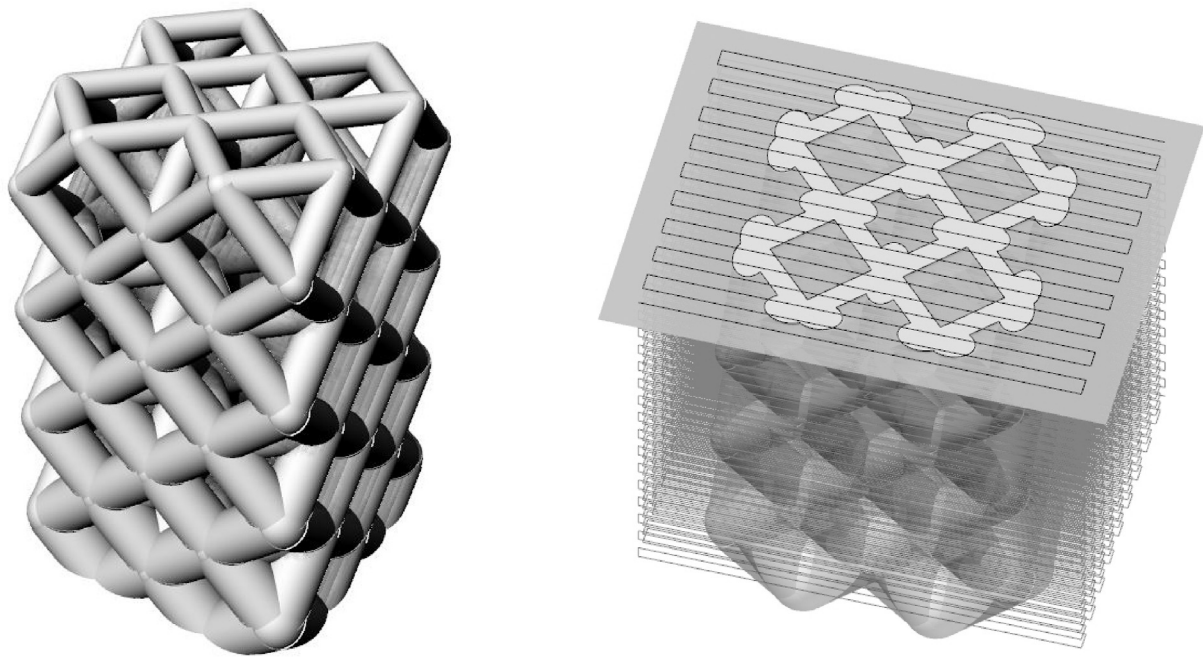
3D model of a printed structure: (a) Axonometric view; (b) Clipped view showing a print head trajectory within the layer.
